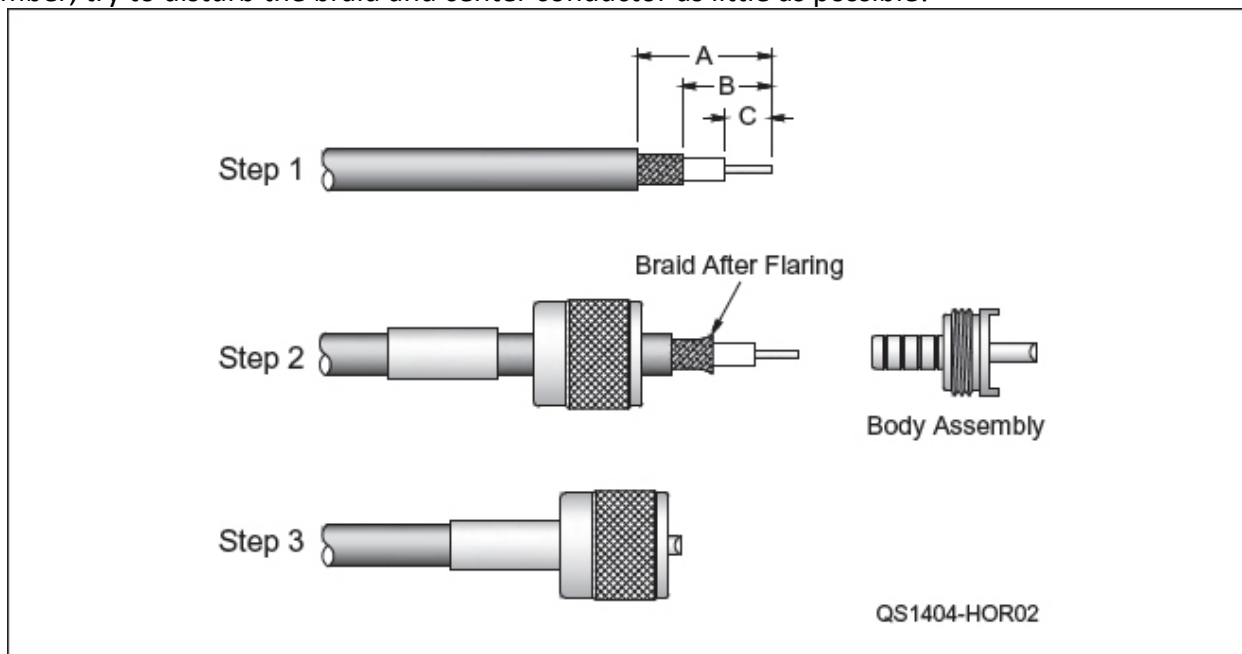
The basic steps to cutting and installing a crimp PL-259 connector. Each manufacturer will specify the right dimensions for A, B, and C. All connectors are not the same!
